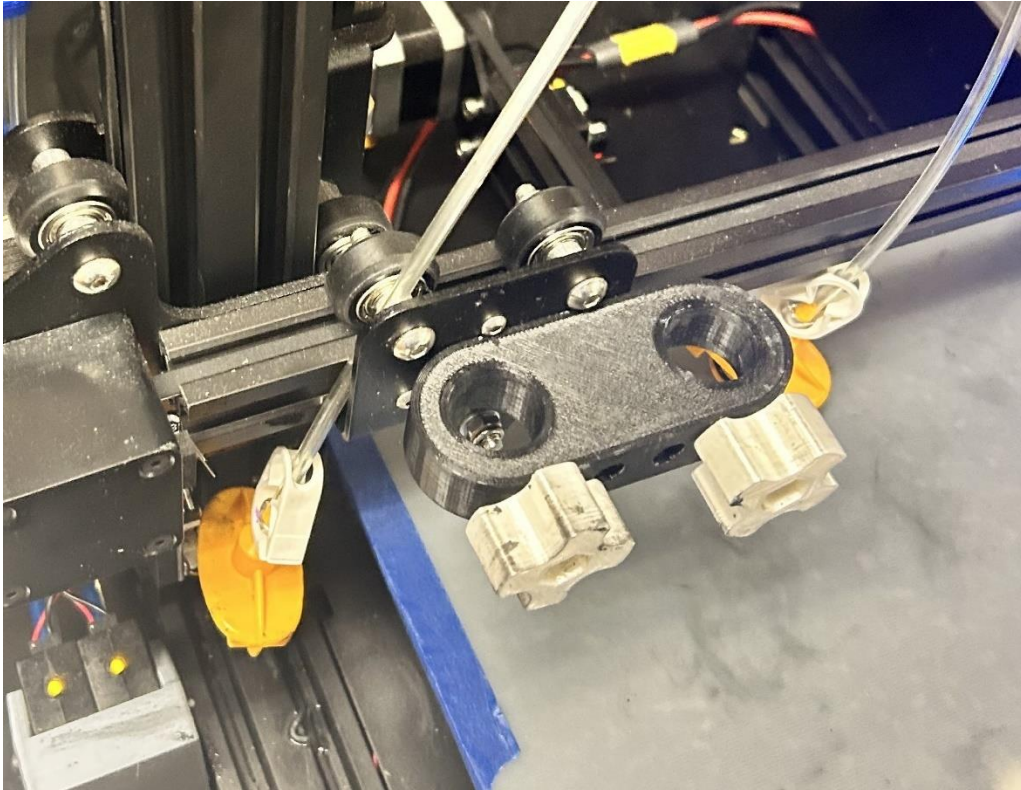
Geometry of the Print Head of the Modified Ender 3 Printer
